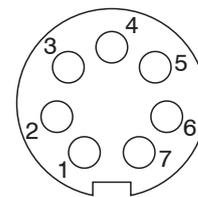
7-pin male cable connector, solder side view, Series 712, Binder
